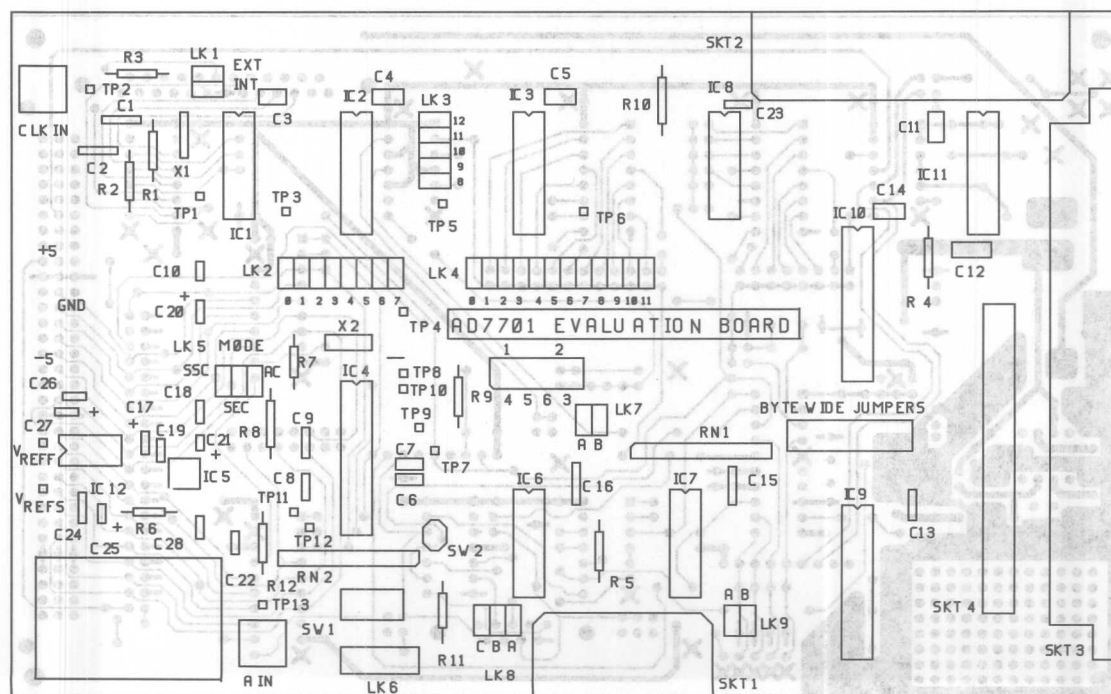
AD7701/AD7703 Evaluation Board Component Layout
